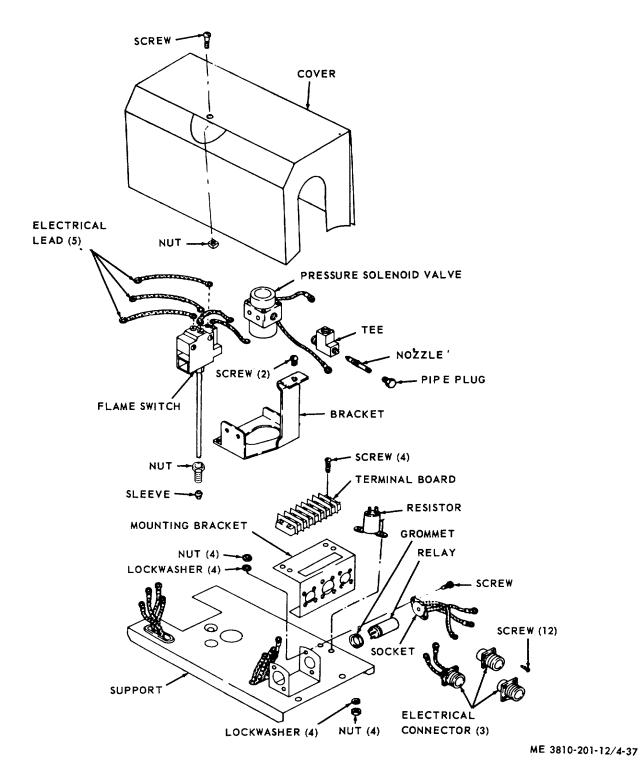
Personnel and engine heater control, disassembly and reassembly.
